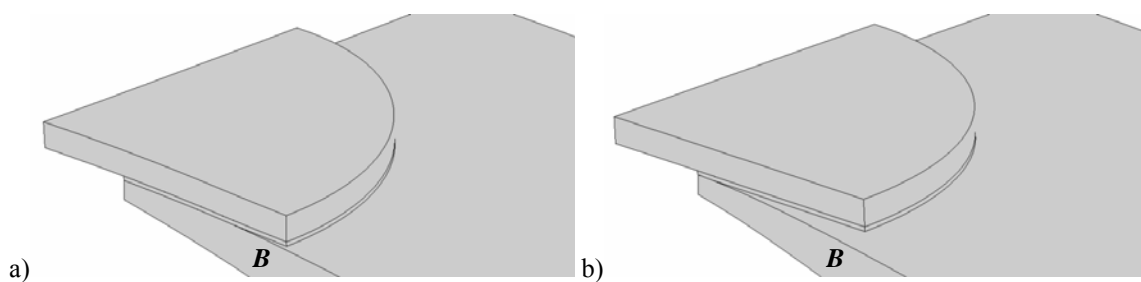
Deformed shape of the 1.5 mm laminate inner chamfer repair at damage onset (a) and patch debonding (b) (bending load).
